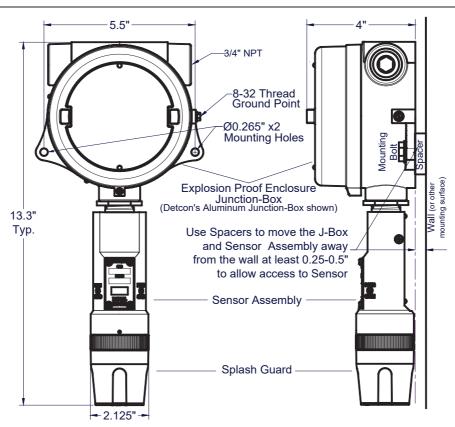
Outline and Mounting Dimensions (Aluminum Junction Box)
